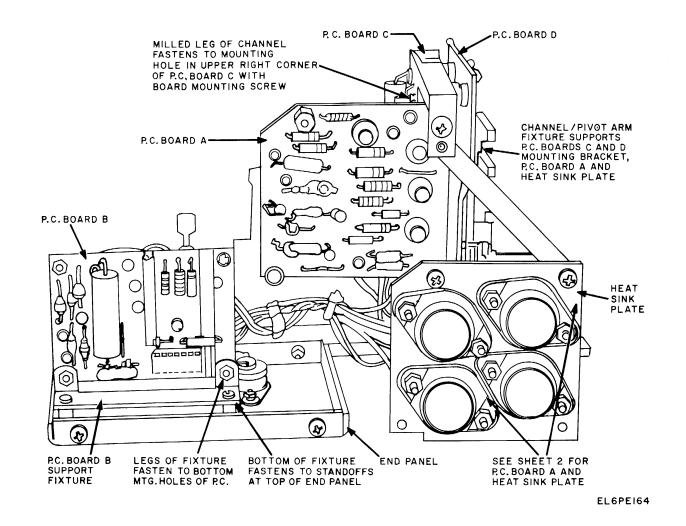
Alarm Monitor Power Supply, Disassembled View Showing Typical Use of Support Fixtures (Sheet 1 of 2).
